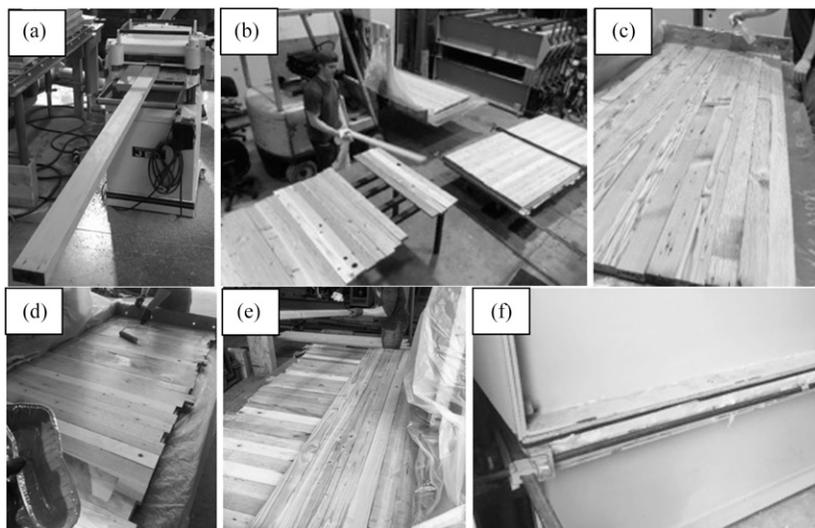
Panel manufacturing process: (a) planning a fresh face, (b) followed by organizing and cleaning laminations, (c) misting surfaces, (d) applying and spreading adhesive, (e) laying up panels, and (f) loading press.
